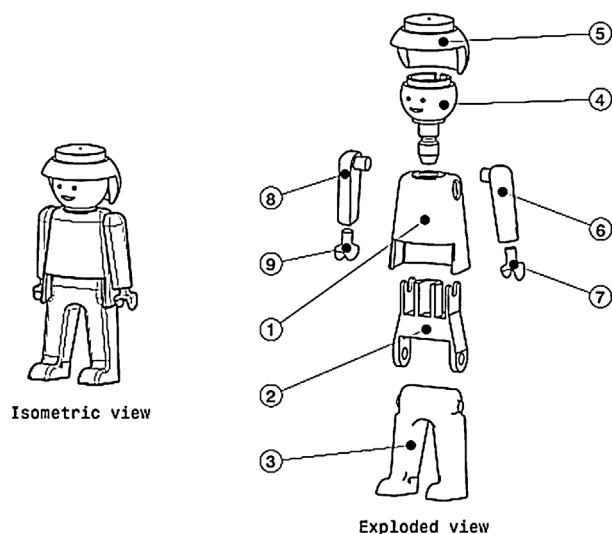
Isometric and exploded views of a previously developed PLAYMOBIL® toy.
